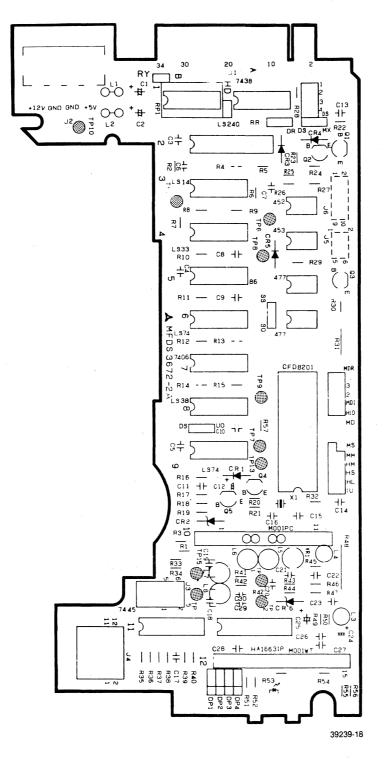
PCB COMPONENT/TEST POINT LOCATIONS, P/N 25284 (455), P/N 25286 (465)
